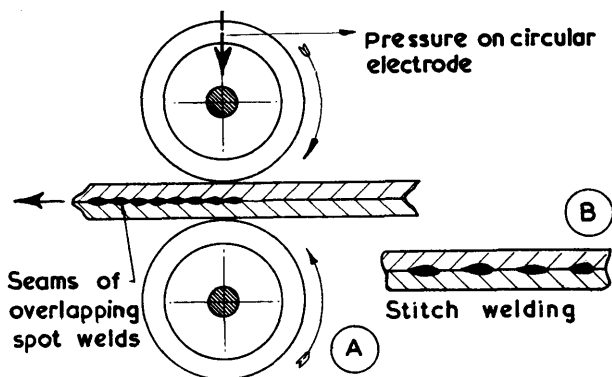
Principle of Seam and Stitch Welding.
